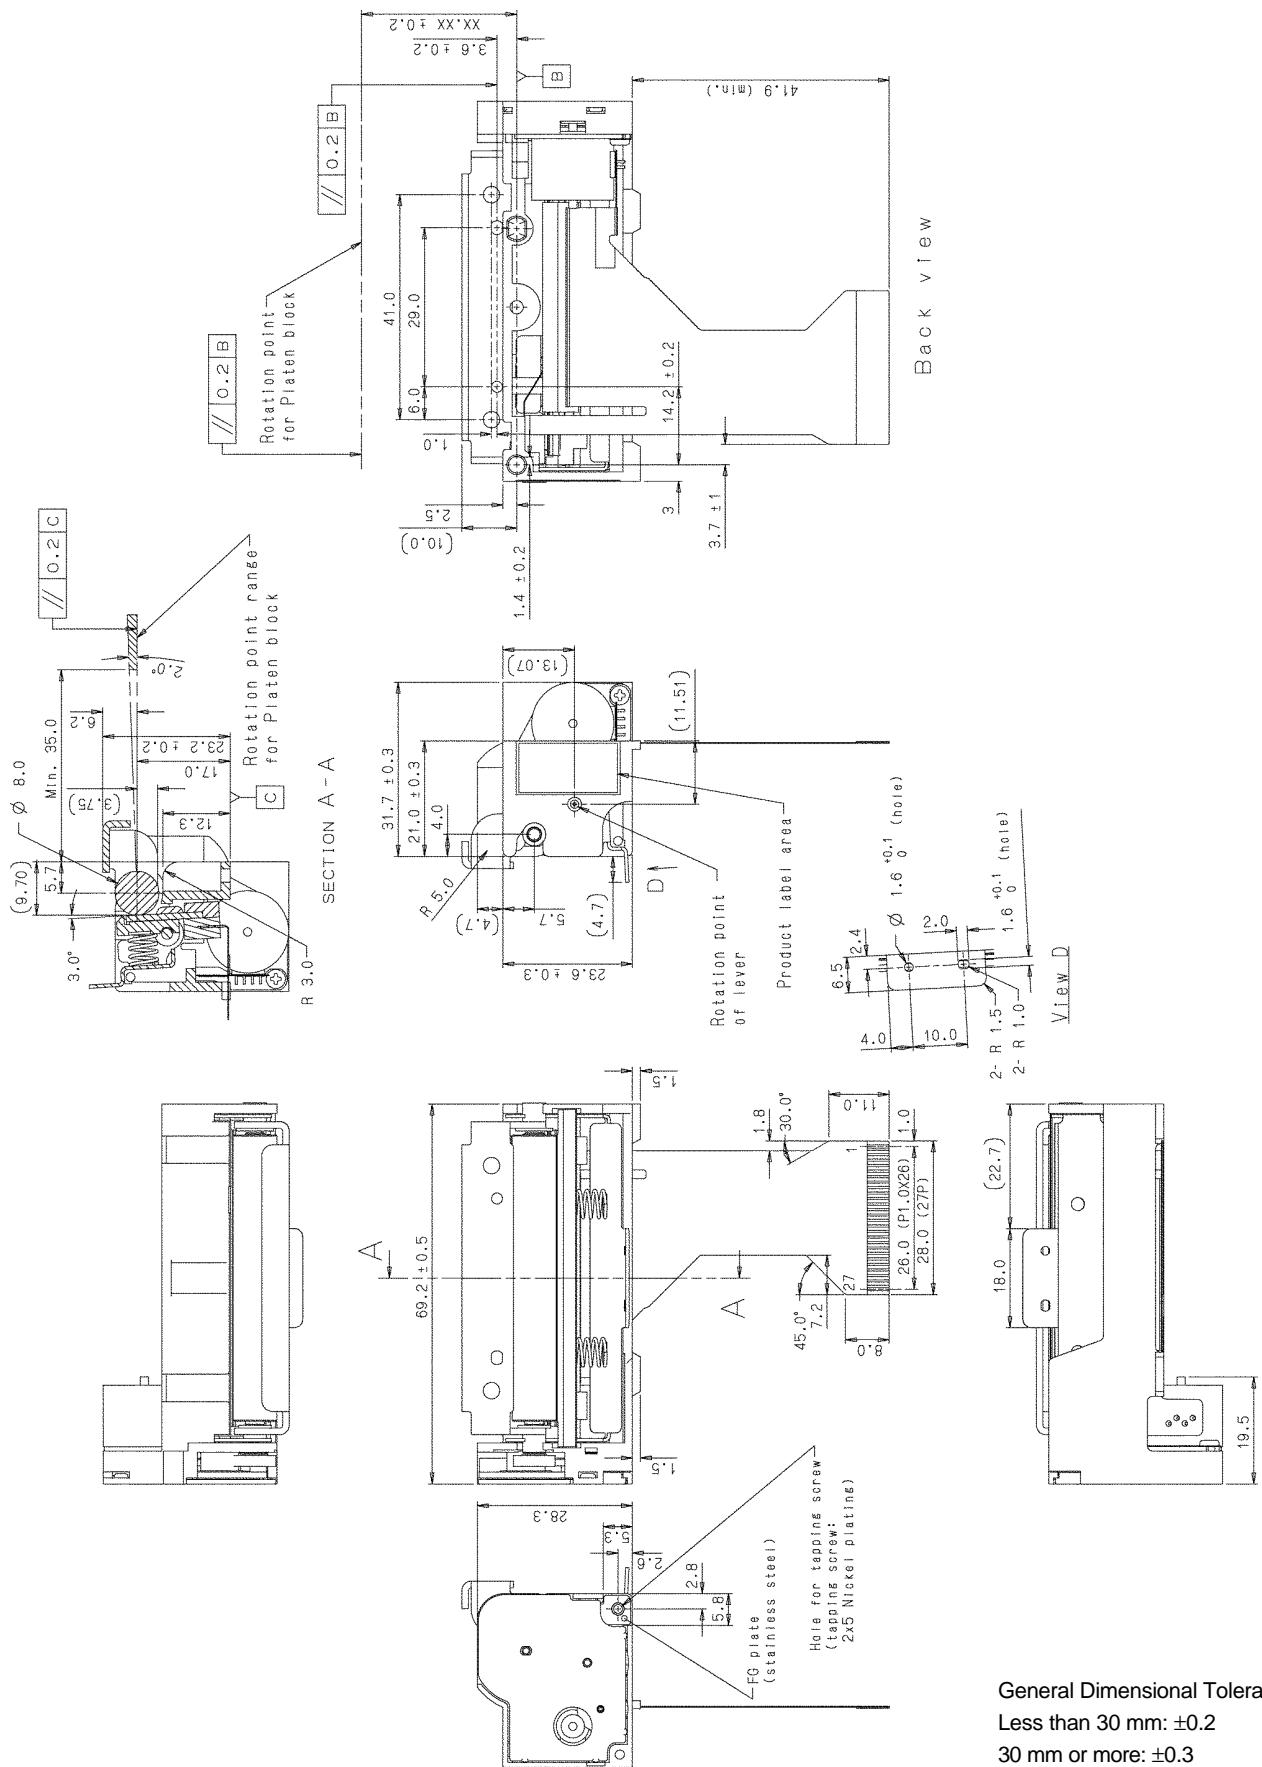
LTPA245D Printer Main Body Appearance and Dimensions
